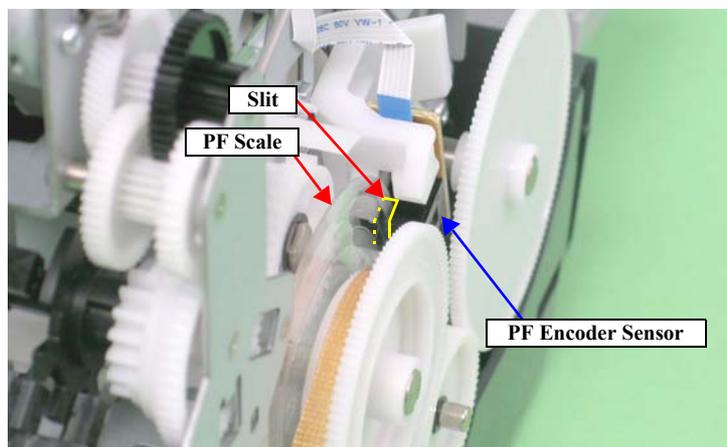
Reinstalling the PF Encoder Sensor Holder
